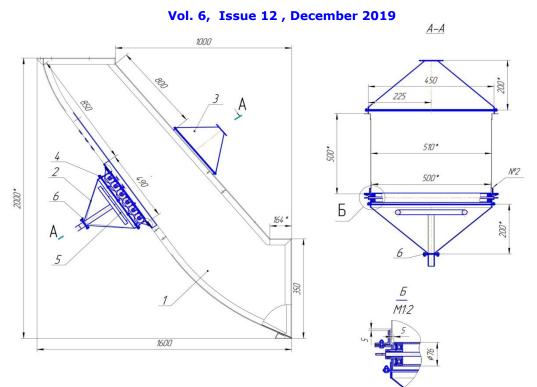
Working drawing of the device built into the fiber heating and humidifying device. 1-chamber tray; 2-pipe; 3-pipe upper part of the pipe; 4-rollers; 5-piece for even steam supply; 6-pipe for steam supply.
